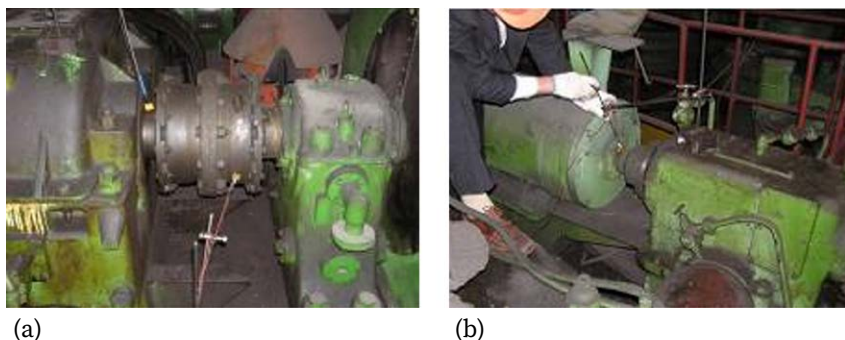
Measurement of gaps in the driveline: (a) gear coupling; (b) screw reducer
